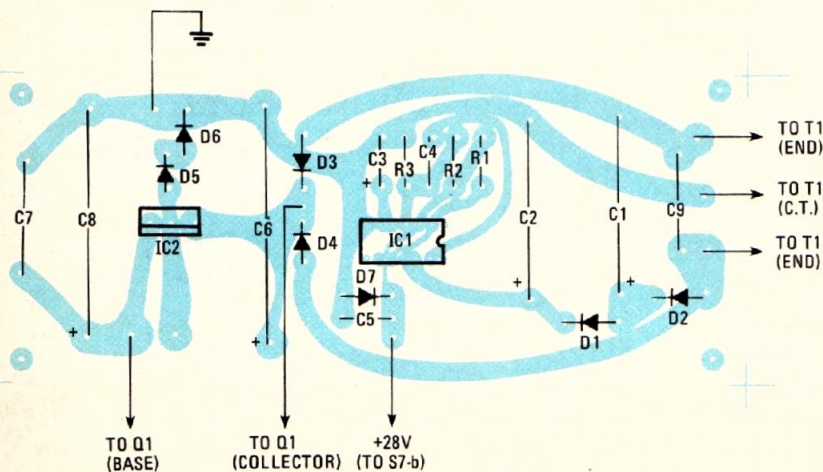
PADS MARKED "TO T1 (END)" may be connected to either end of transformer's primary winding. Pad marked "C.T." must go to center tap.
